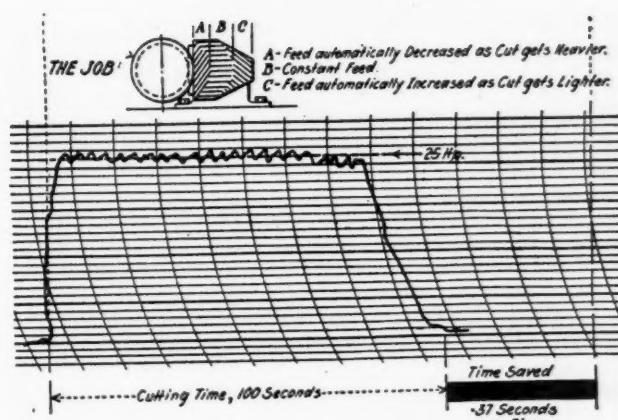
Power chart for cutting same job as shown in Fig. 3 but with cam controlled variable feed to give constant metal removal for entire job. Cincinnati Milling Machine studies
